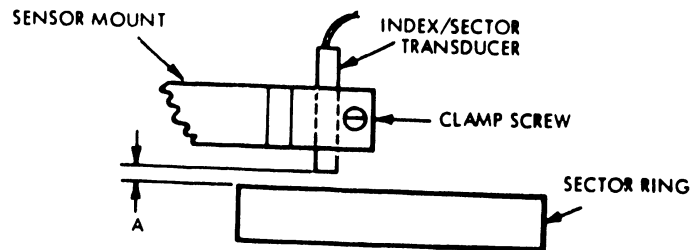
INDEX ALIGNMENT TOOL INSTALLATION
